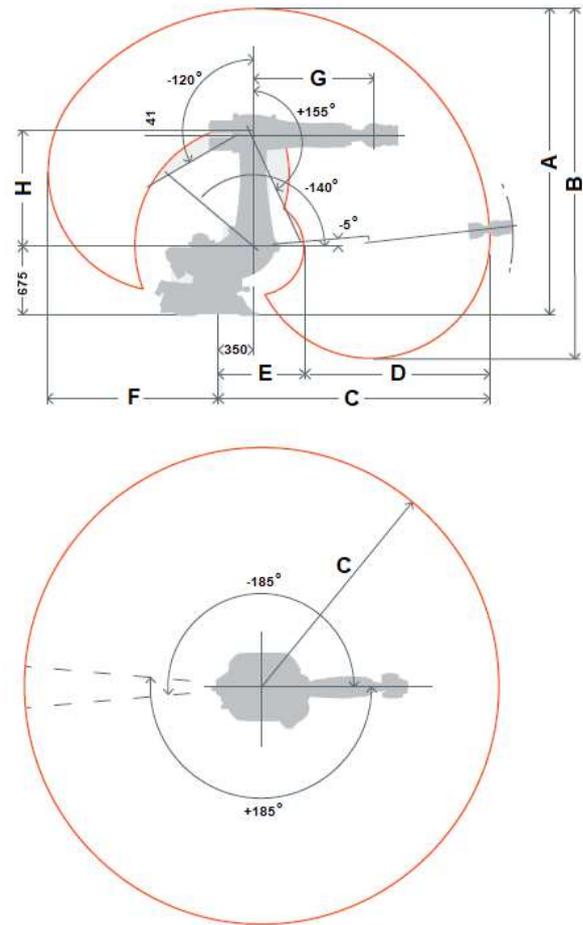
Overall dimensions and workspace of KR 210 R2700 extra industrial robot [10].
